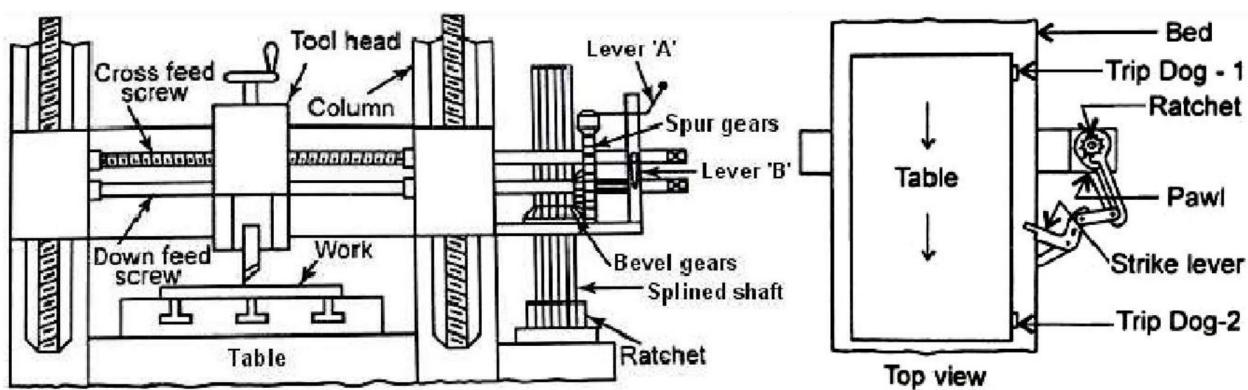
Front and top view of the automatic feed mechanism of a planer
